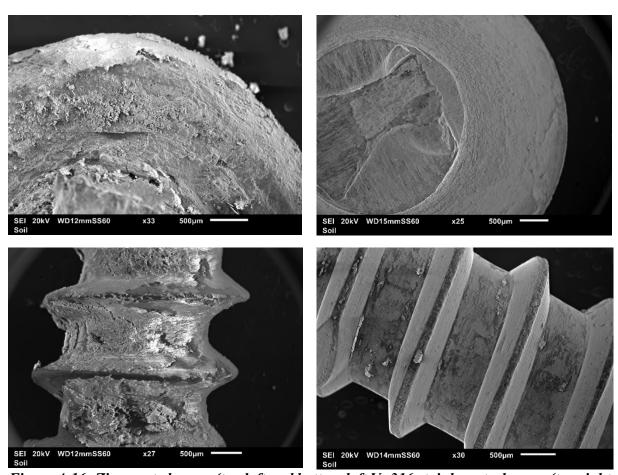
Zinc coated screw (top left and bottom left Vs 316 stainless steel screw (top right and bottom right) of MgO sample B (steel)
